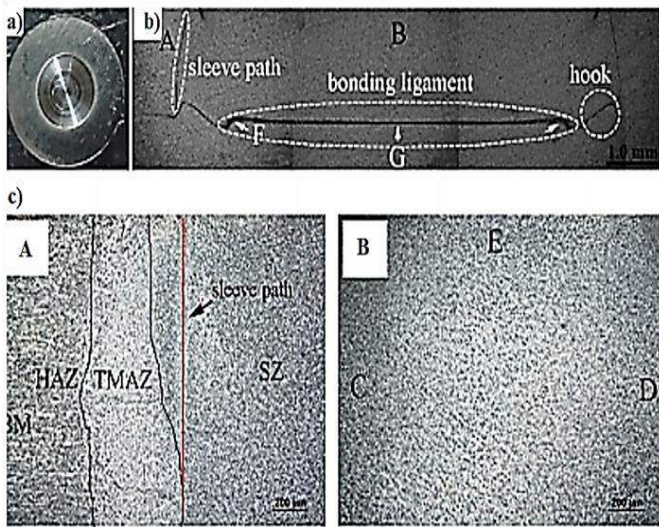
Macroscopic appearance of and microstructure of FSSW joint made at welding condition of the rotational speed of 1500 rpm and dwell time of 3 s: (a) top view of weld zone, (b) cross section of weld zone and (c) magnified views of the regions A-B marked in b [24].
